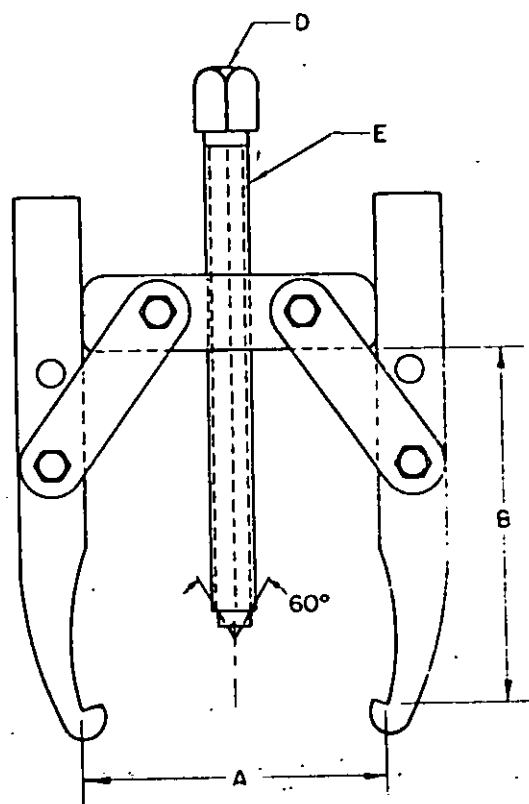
Type I, class 1, style A, puller, mechanical, gear and bearing, two-jaw, external, single end grip.
